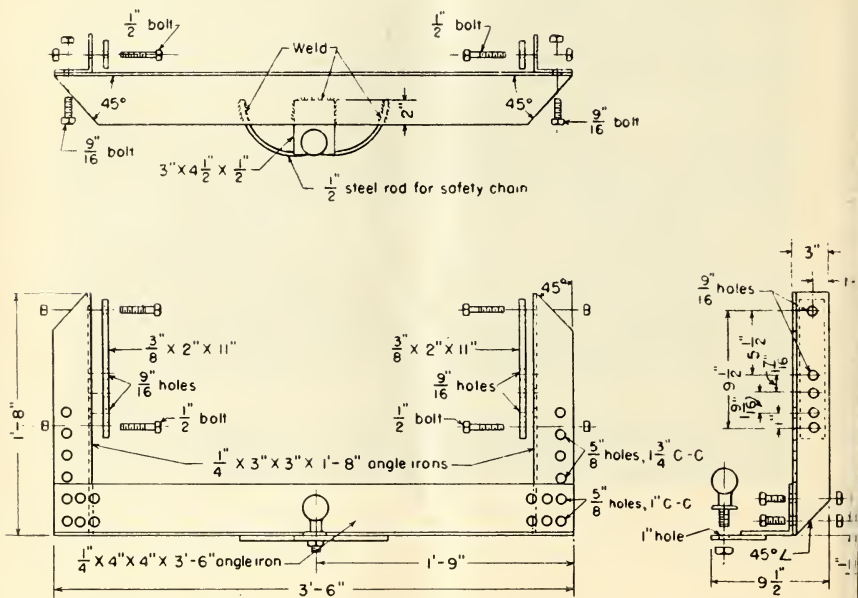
Construction details of adjustable trailer hitch assembly.
